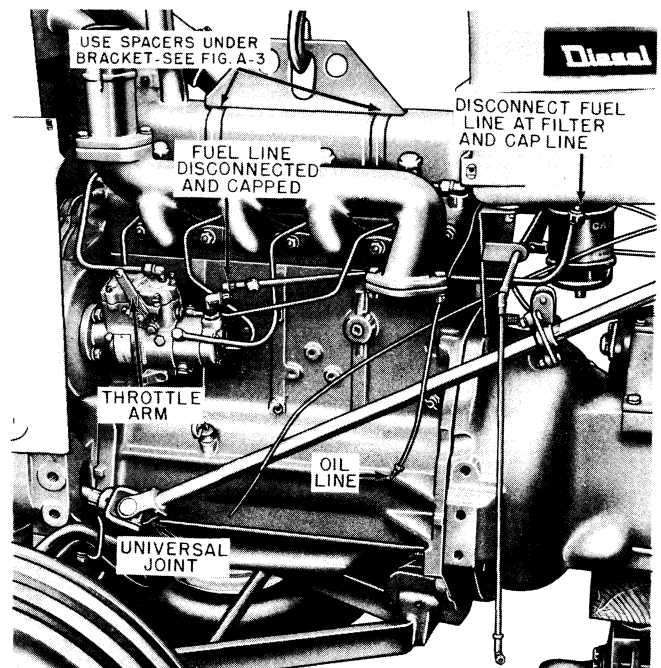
L.H. View - Splitting Engine from Torque Tube
